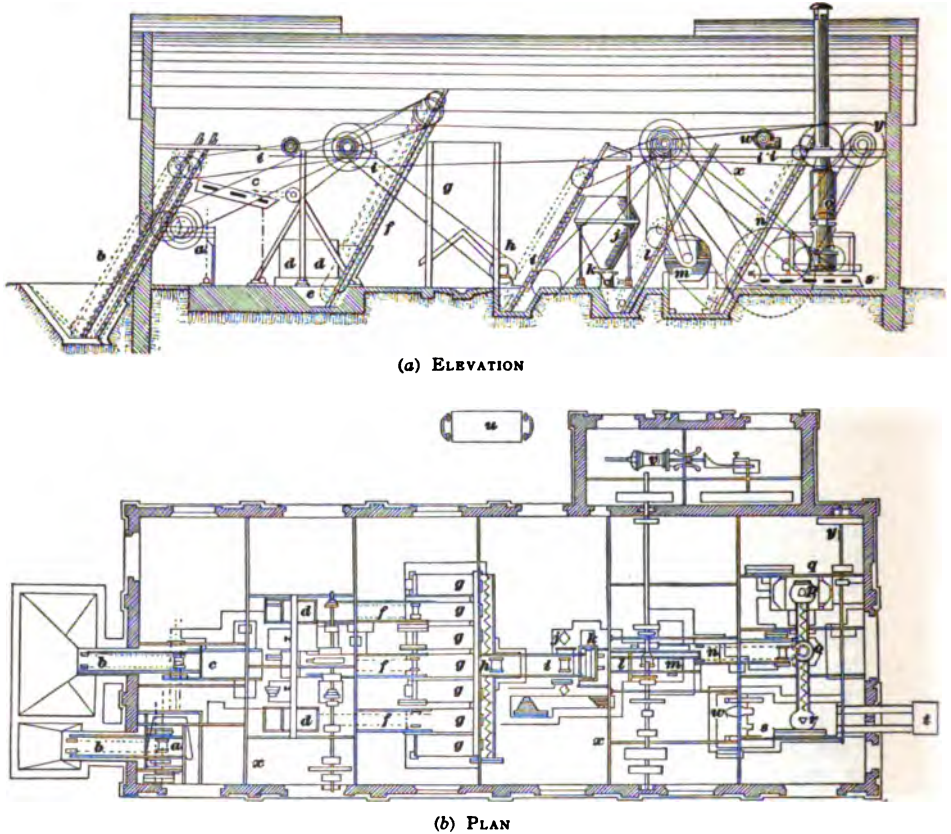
MACHINE FOR SORTING, WASHING, AND MAKING BRIQUETED FUEL
